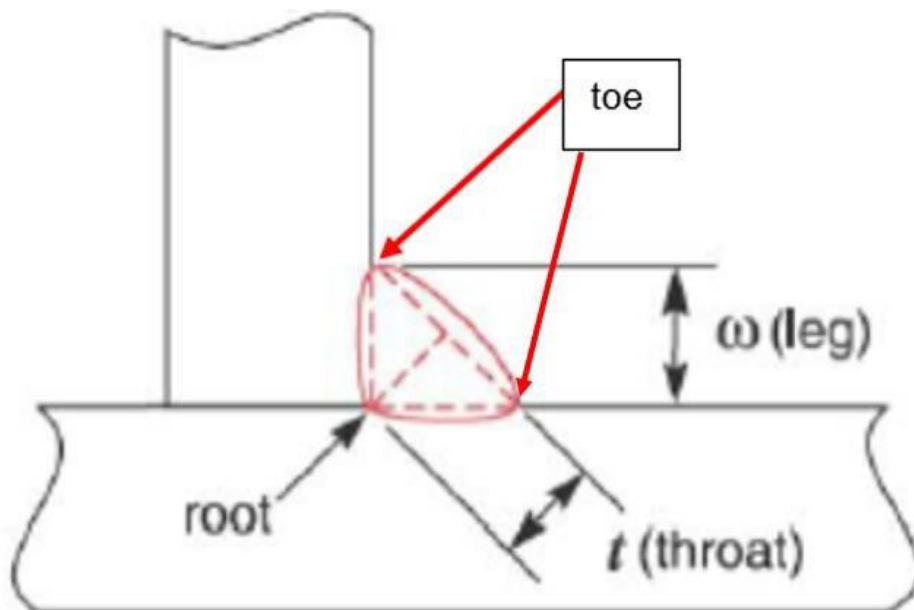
Weld throat and leg dimensions, with toe indicated (adapted from https://www.researchgate.net/figure/Dimensions-of-the-fillet-weld_fig1_264036794).
